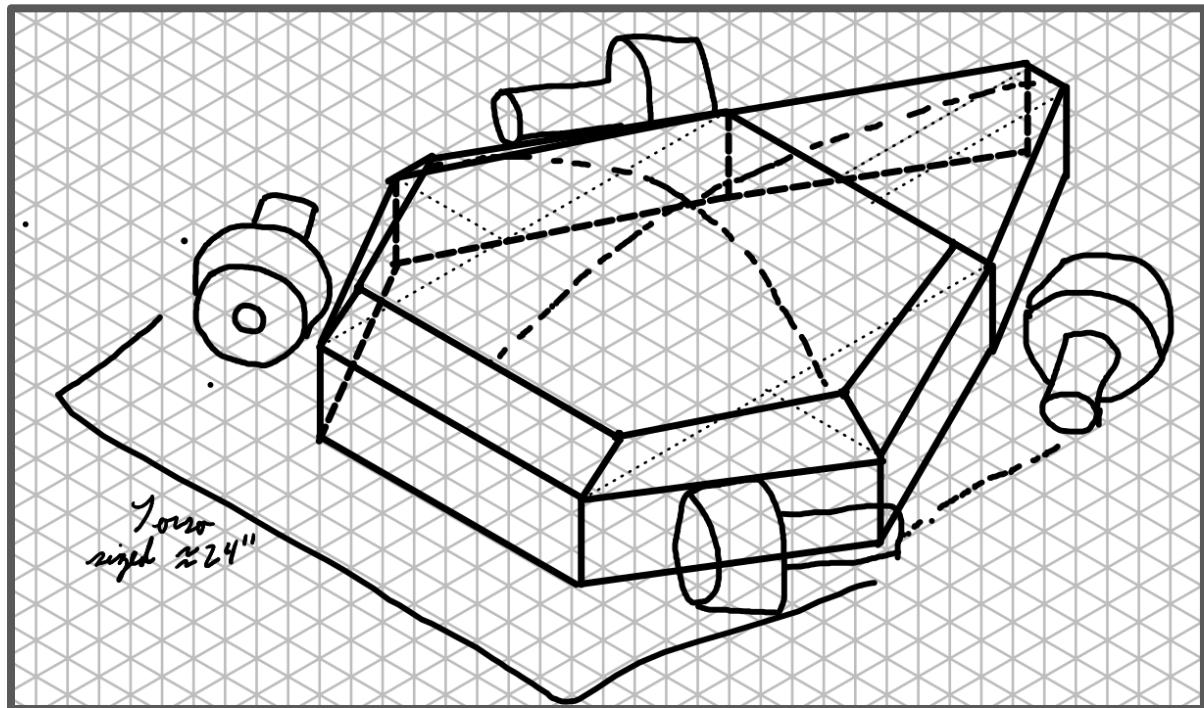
Isometric drawing of The Turkey design. The design will be 24 inches long, 25 inches wide, and 10 inches tall.
